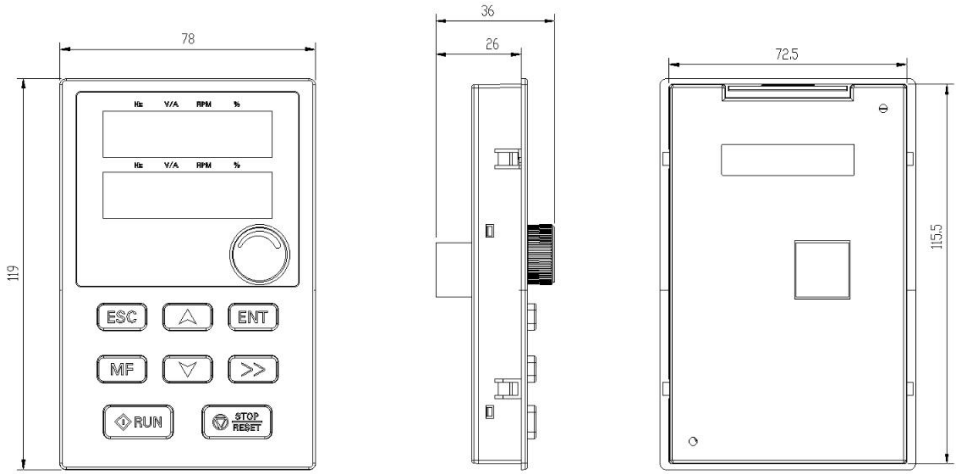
Appearance and dimensions of a keypad of 22kW above (unit: mm)
